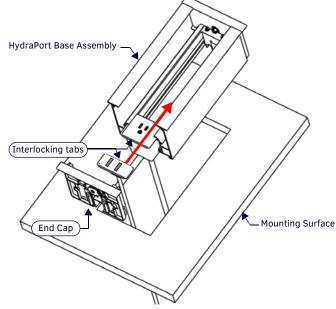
INSTALLING THE HPX-U100-2BTN MODULE
